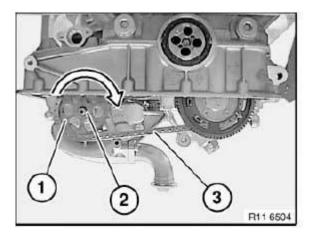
Rotating Oil Pump Shaft Courtesy of BMW OF NORTH AMERICA, INC.
